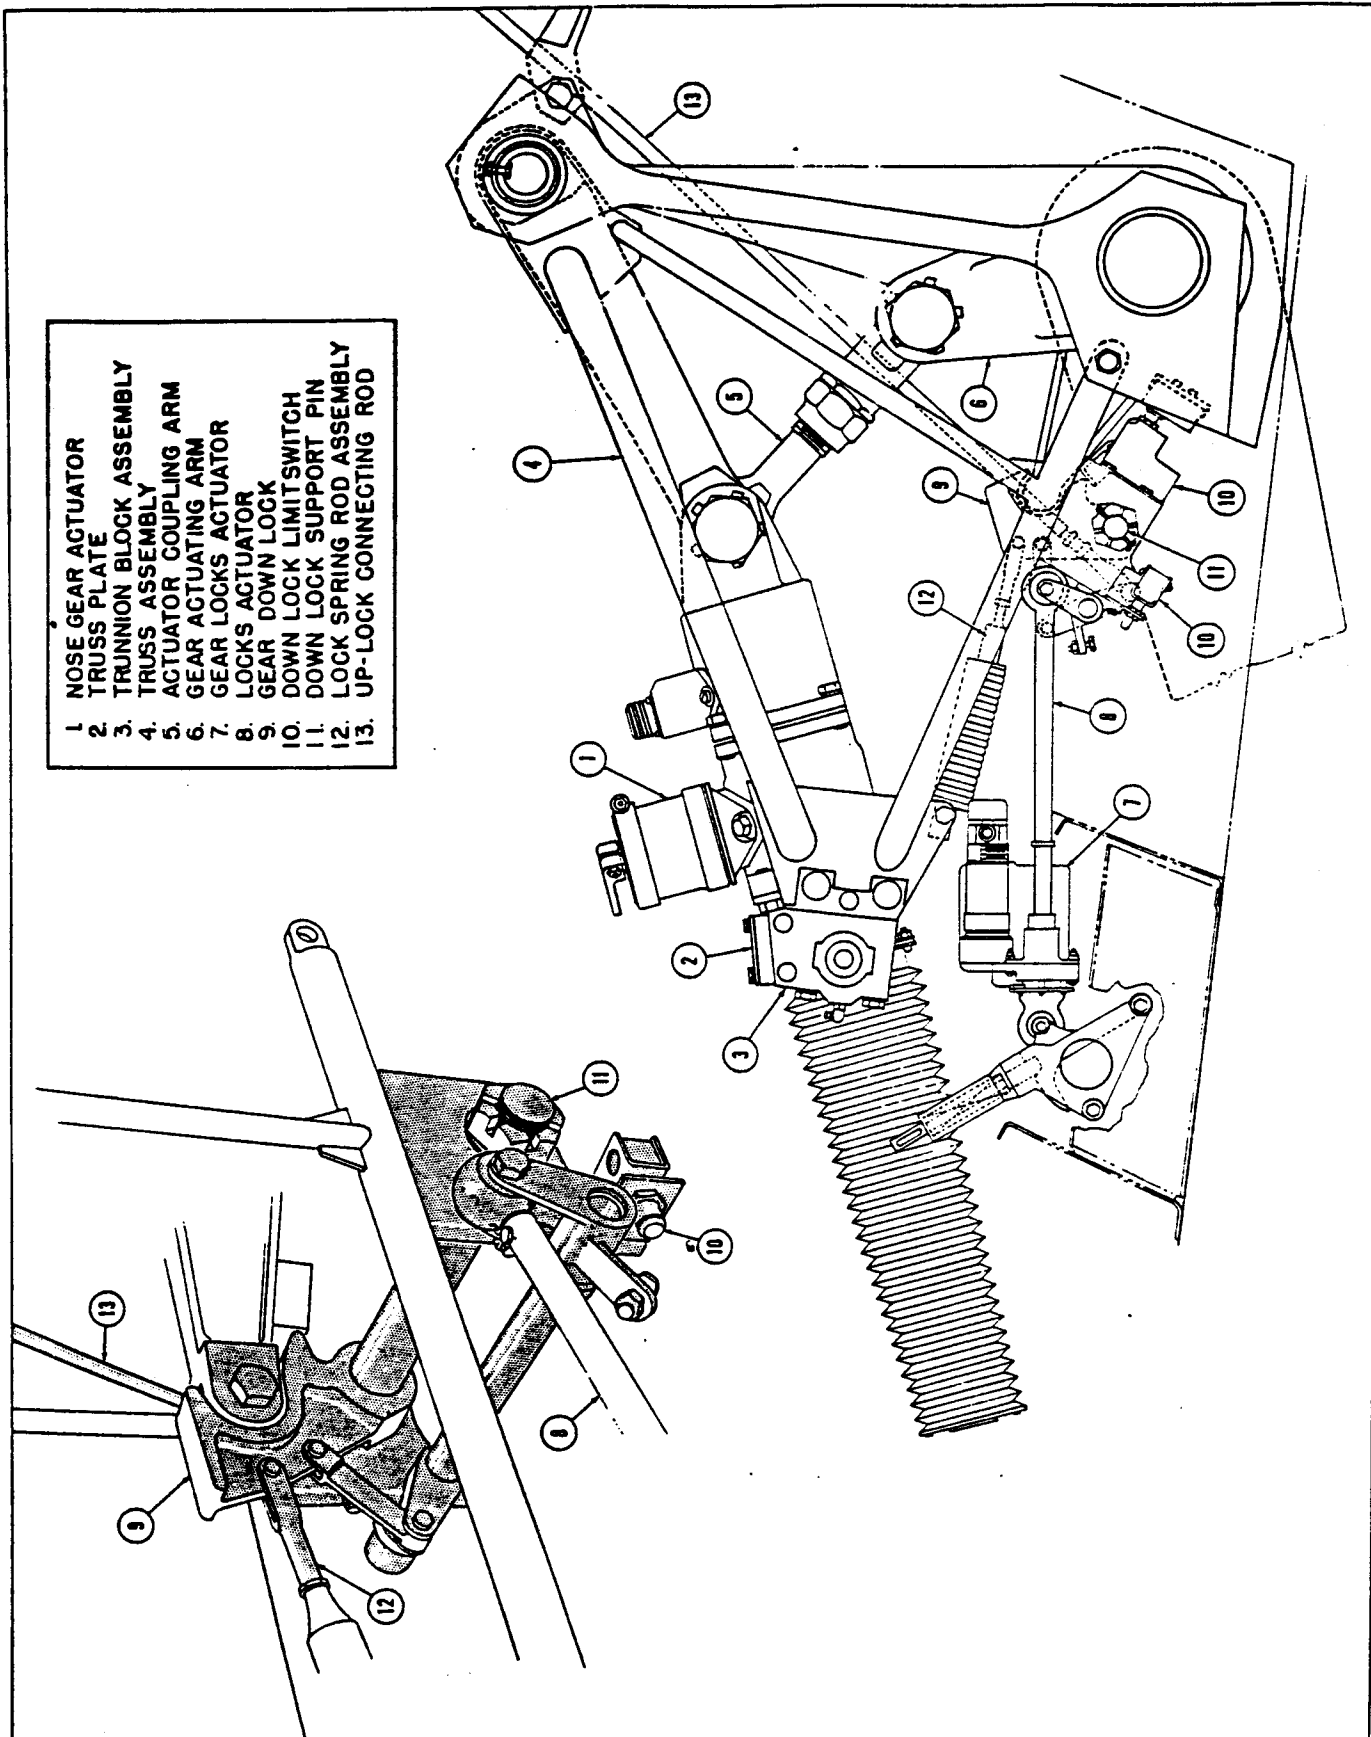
Nose Gear Actuator, Down-Lock and Locks Actuator
